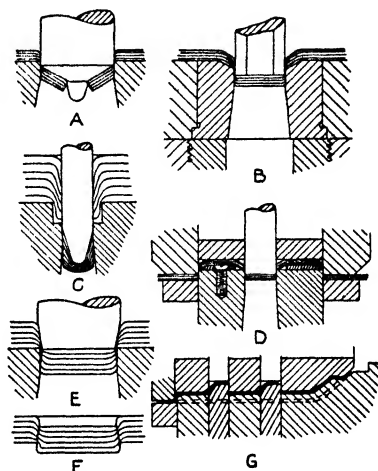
Several methods of forming while blanking or piercing, shown diagrammatically.
